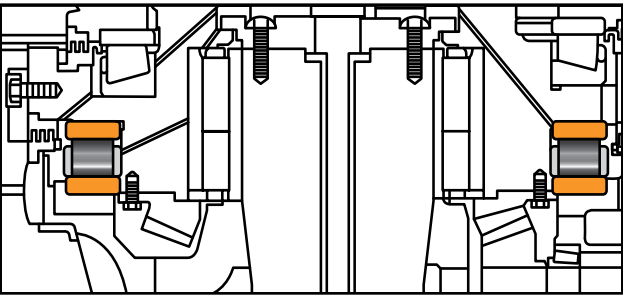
Typical mounting arrangement of thrust cylindrical roller bearing in crusher application.
